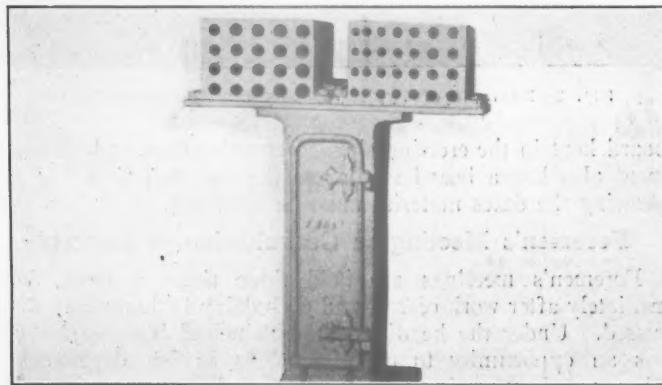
Master Gage Blocks for Taper Bolts Kept in the Bolt Department
